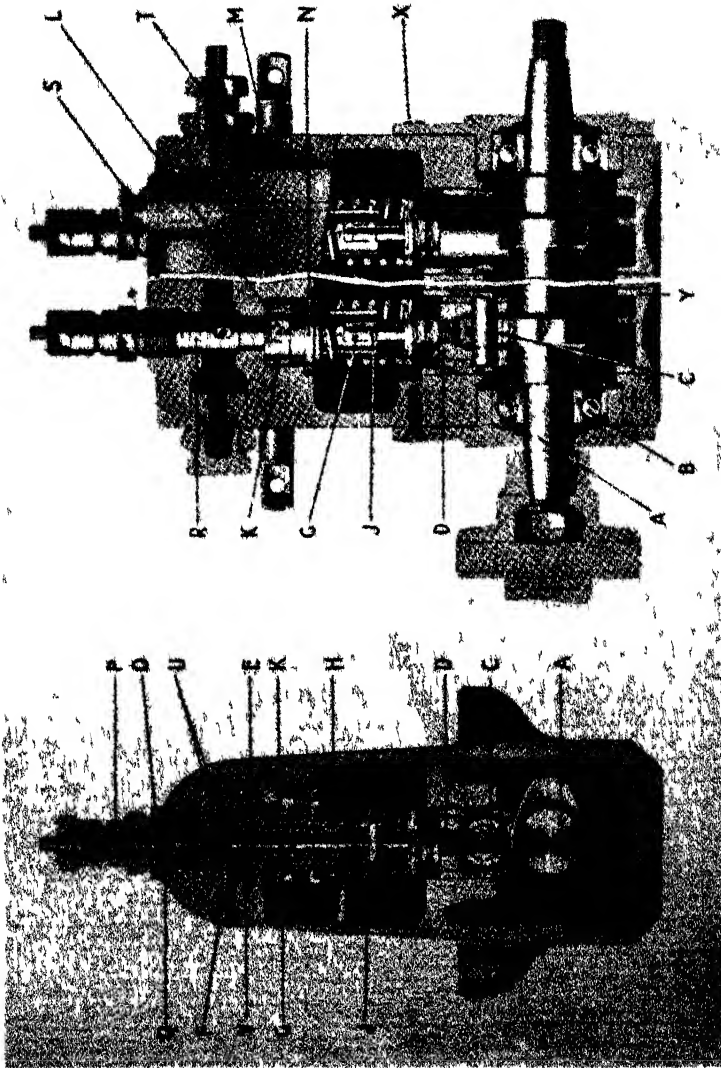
The C A V -Bosch Fuel Pump as used on Leyland Engines
